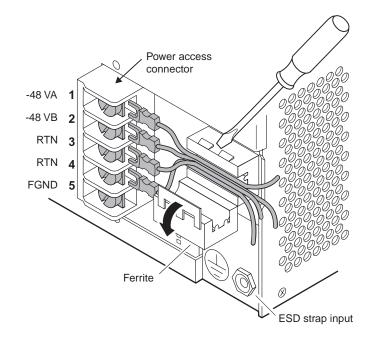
Opening the Ferrite and Routing the Battery Feed Wires (Right-Hand Side, Rear View)
